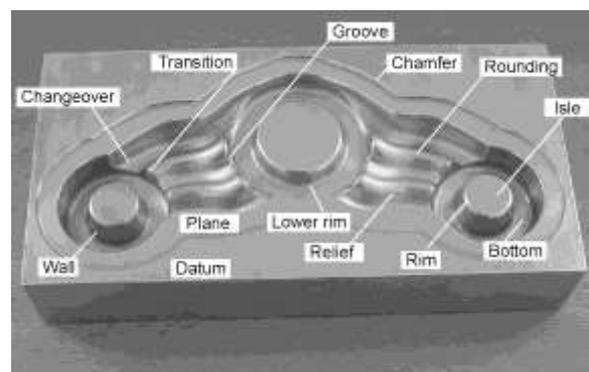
Some design elements in tool making of the lower die: design attributes and elements with definite dimensions
